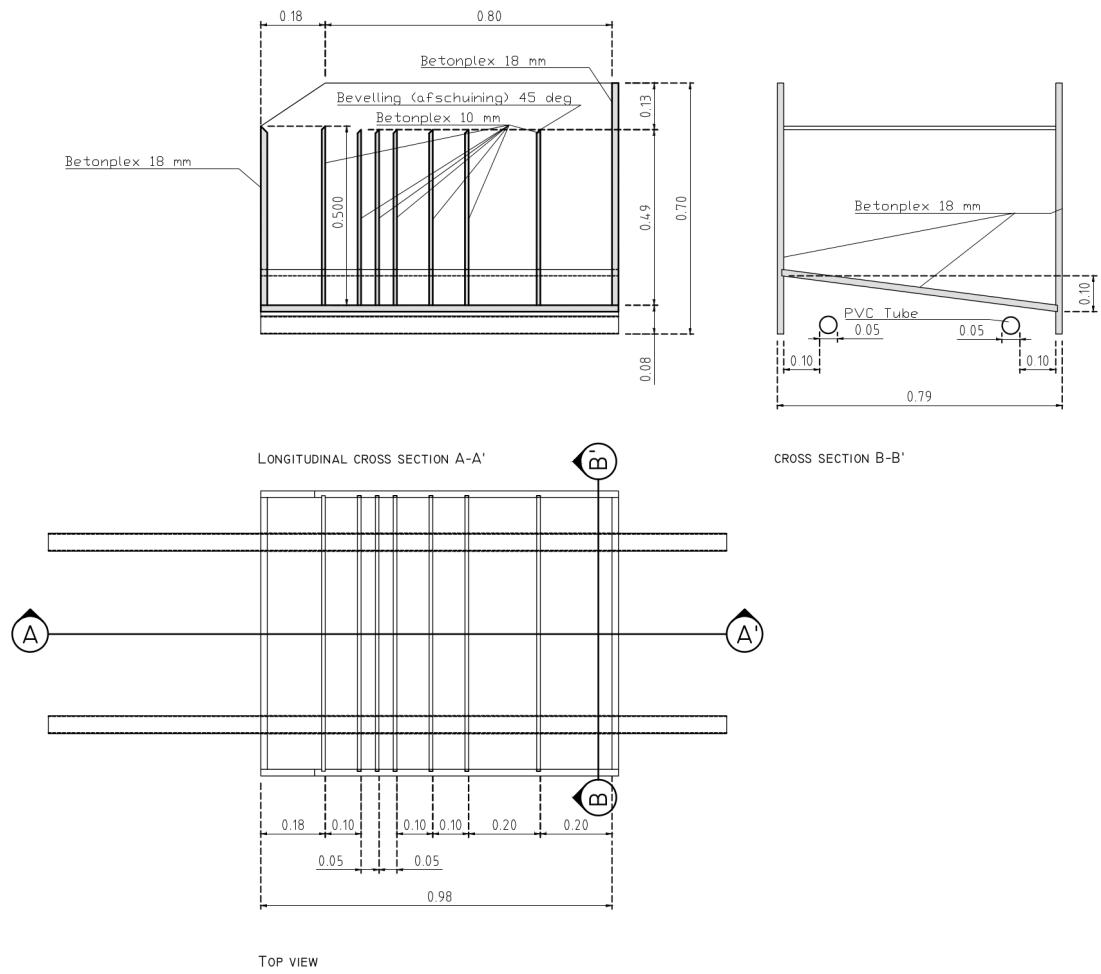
CONSTRUCTION DRAWINGS FOR THE COLLECTION BIN
